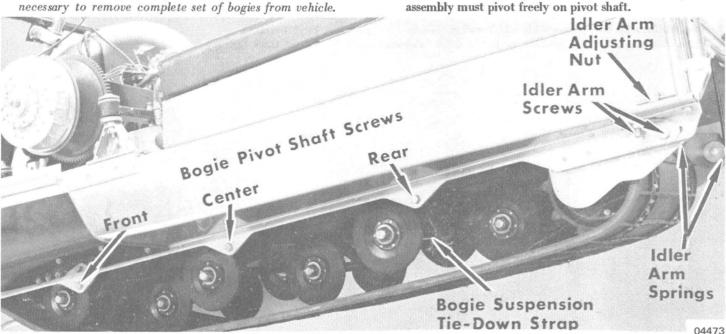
Bogie Wheel Pivot Shaft Screw Location
